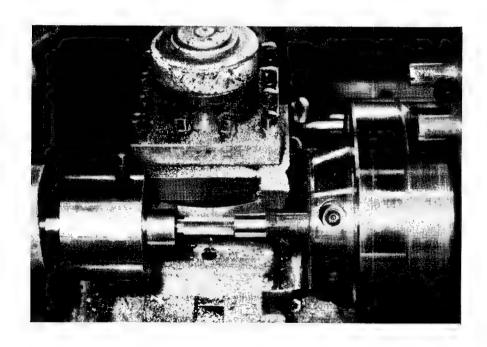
Finishing Threads in Cap Section with Bottom Tap
